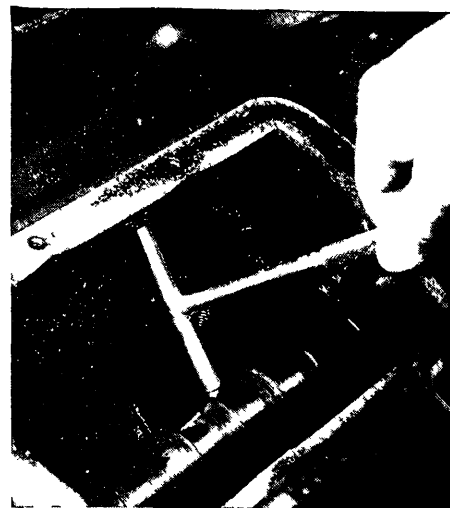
Checking valve stem length. 1936-48 V8 engines
